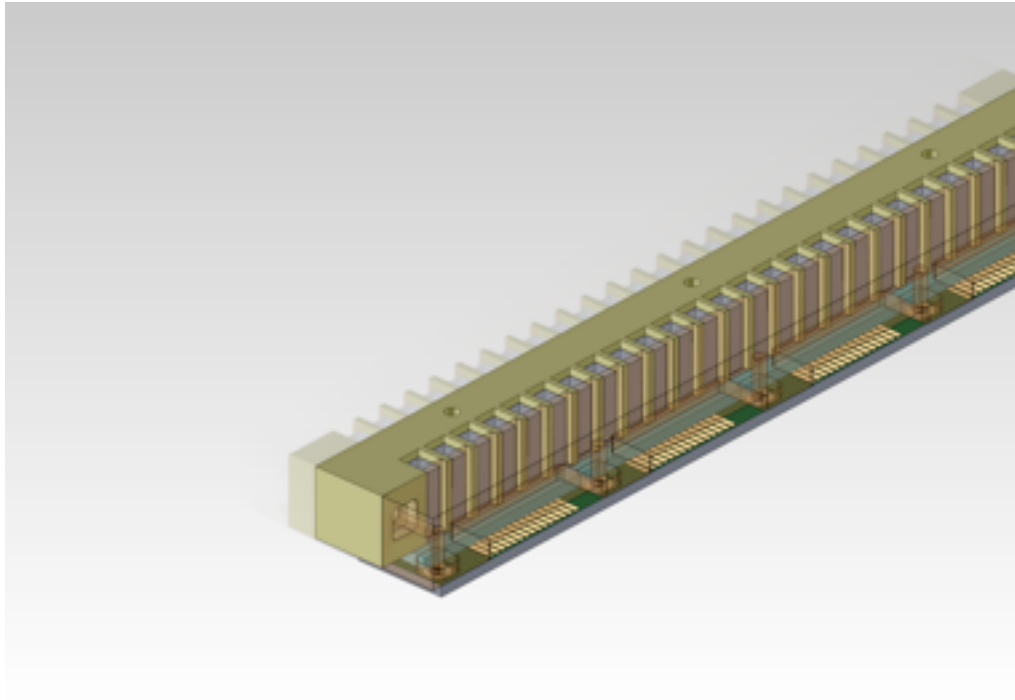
Circuit board with mounted MPPCs, light guides, and light isolation fixture.
